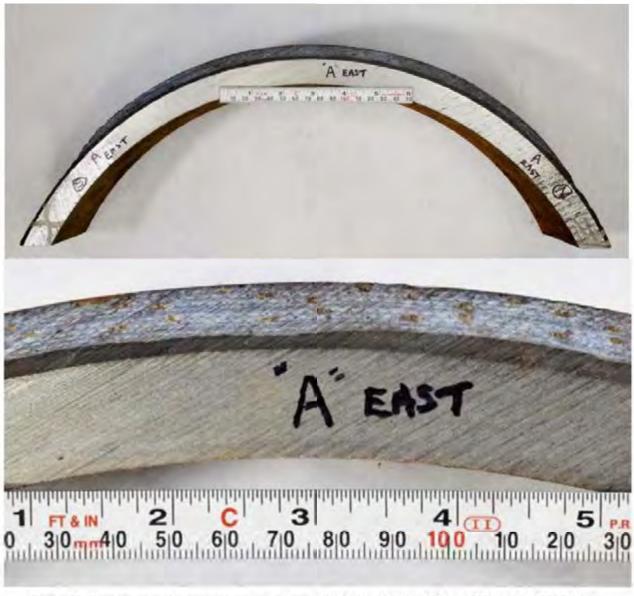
Photographs of rough cut cross-section through repair Area "A" (a patch repair with stricture banding).
